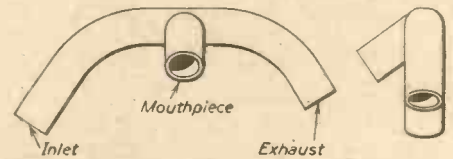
Shaping of 3/4in. copper tube to form the mouthpiece. The rubber "gag" which fits on to the short arm can be taken from a conventional snorkel tube.
